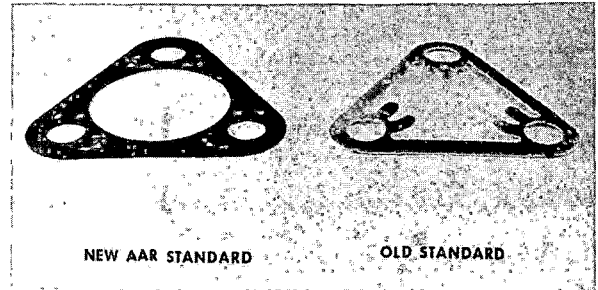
CAP SCREW LOCKING PLATE DESIGNS
